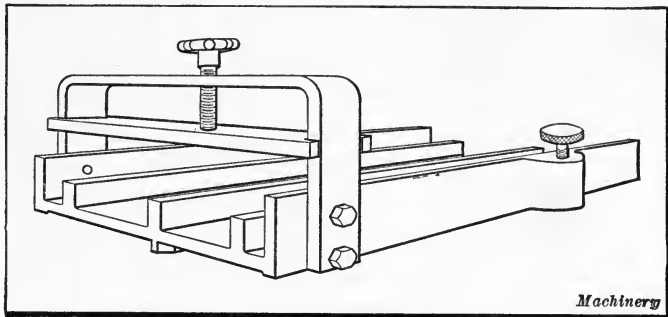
Perspective View of Boring and Reaming Fixture showing Arrangement of Clamping Mechanism
